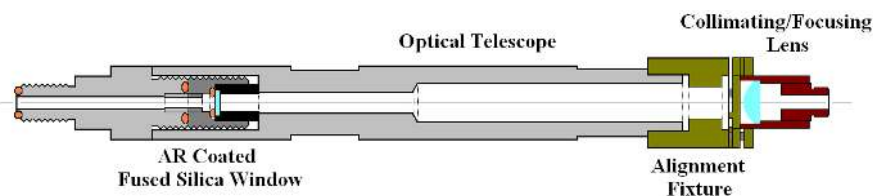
Optical telescope and window assembly with fixture for adjustment of laser beam alignment.
